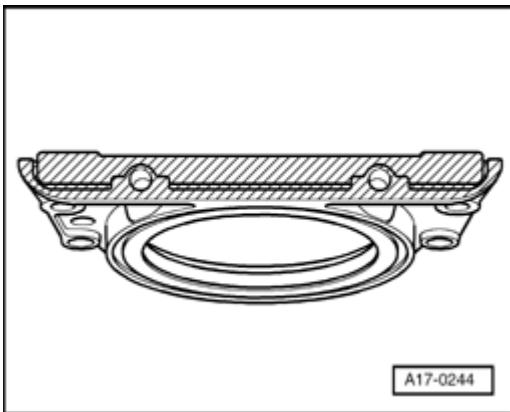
Thinly Coating Lower Sealing Surface At Sealing Flange With Silicone Sealant
